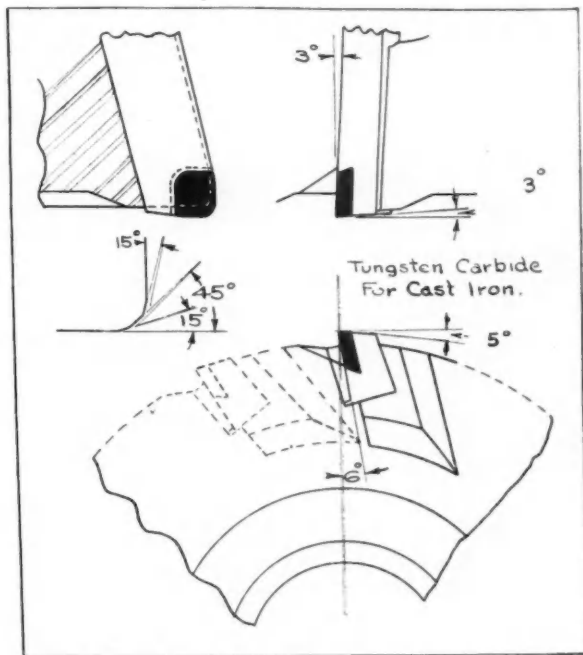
K & T cemented-tungsten carbide milling cutter for soft or medium cast iron. Note recommended tool form + + + + +
